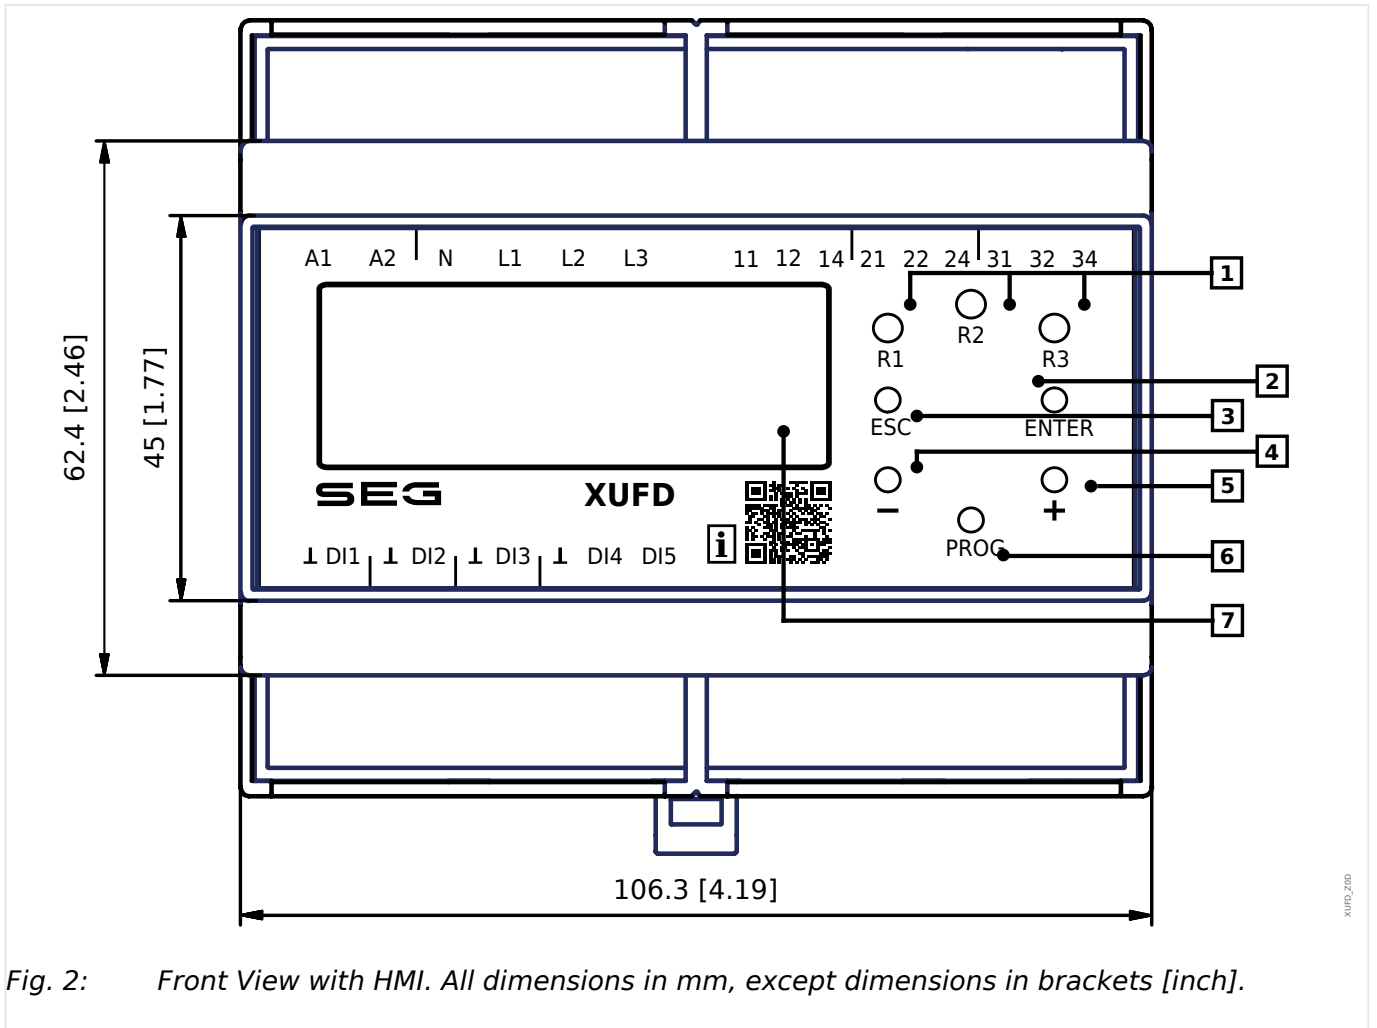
Front View with HMI. All dimensions in mm, except dimensions in brackets [inch].
